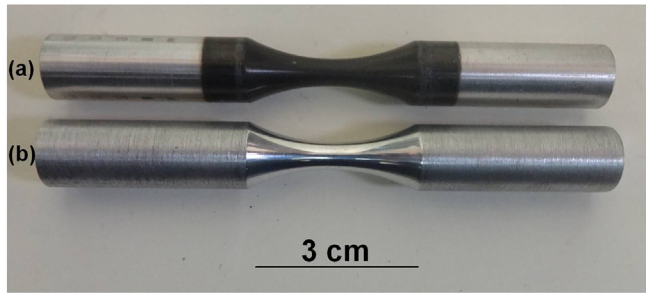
Photograph of (a) DLC coated and (b) uncoated fatigue specimens prior to testing.
